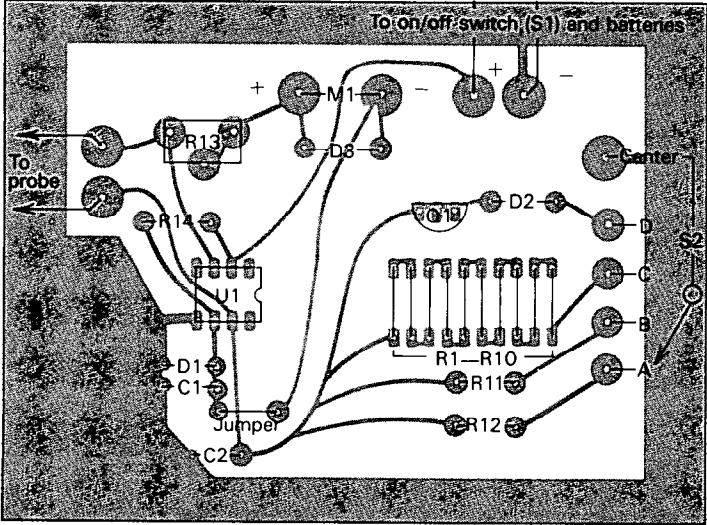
Printed Circuit. Use diagram to lay out printed circuit and add components. Black lines are circuits printed on underside of board. Underside of board is shown here. Parts are coded and refer to the parts list at right.
